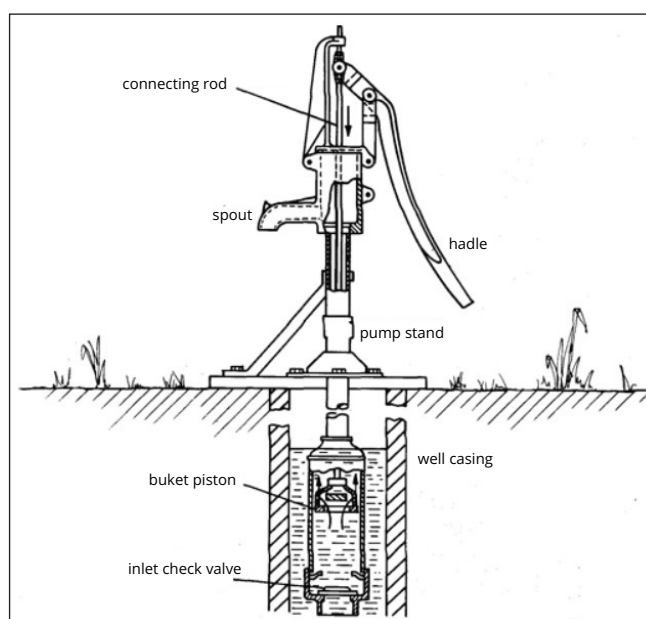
Hand Pump with Single-acting, Bucket Piston¹⁹
